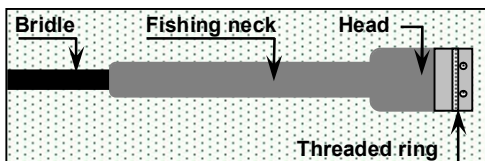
The Schlumberger Universal Head or so-called U-Head.
